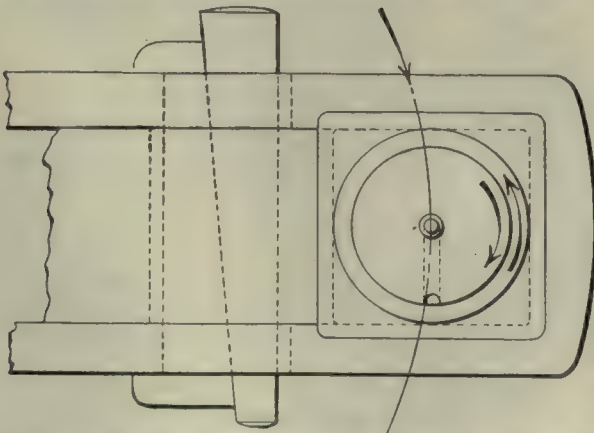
EFFICIENT METHOD OF LUBRICATING A CRANKPIN BEARING
